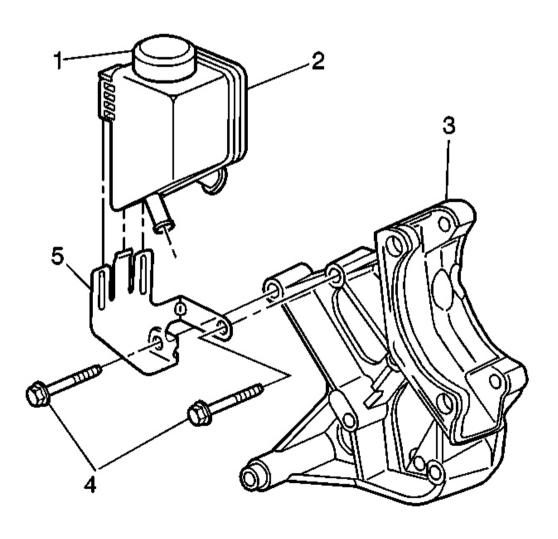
Power Steering Fluid Reservoir, Capstick, Bracket & Bolts
